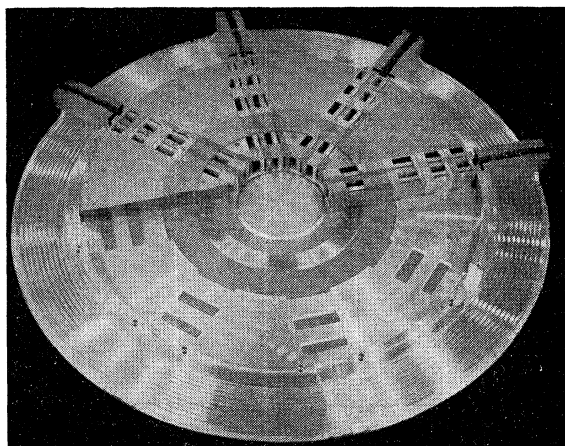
A photograph of the partly assembled rotor. The 4 pairs of arms enclose the narrowest regions of 4 pairs of rotor slits. The rotor is made up of many pieces of plastic held between two aluminum forgings. It has a 30-in. diameter and weighs 250 pounds.
